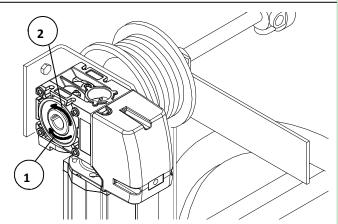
Opening rotation direction, when door operator mounted as shown in the picture.
